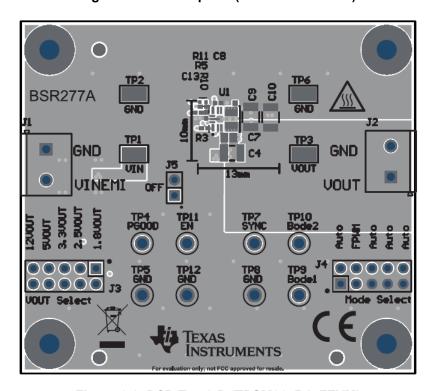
PCB Top 2-D (TPSM365R15FEVM)
